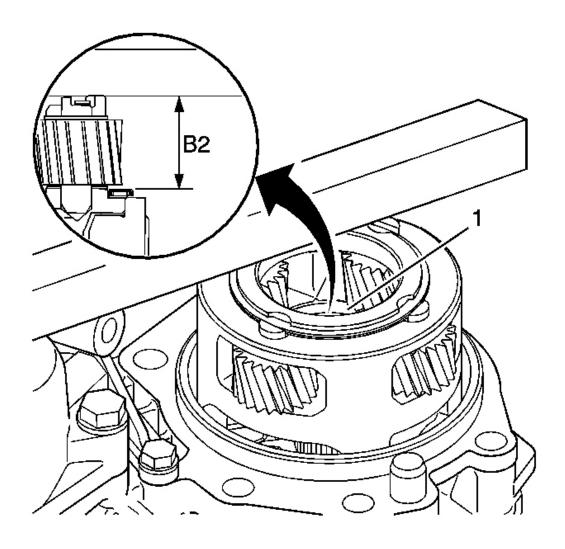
Measuring Dimension B2 Courtesy of GENERAL MOTORS CORP.
